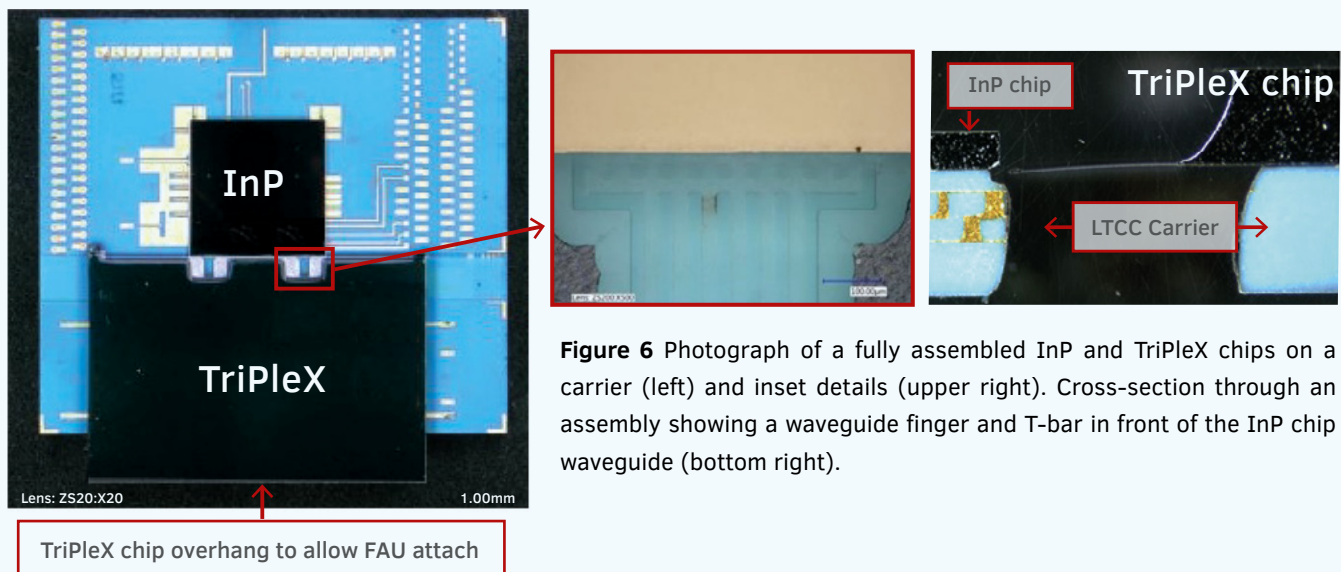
Photograph of a fully assembled InP and TriPLeX chips on a carrier (left) and inset details (upper right). Cross-section through an assembly showing a waveguide finger and T-bar in front of the InP chip waveguide (bottom right).
